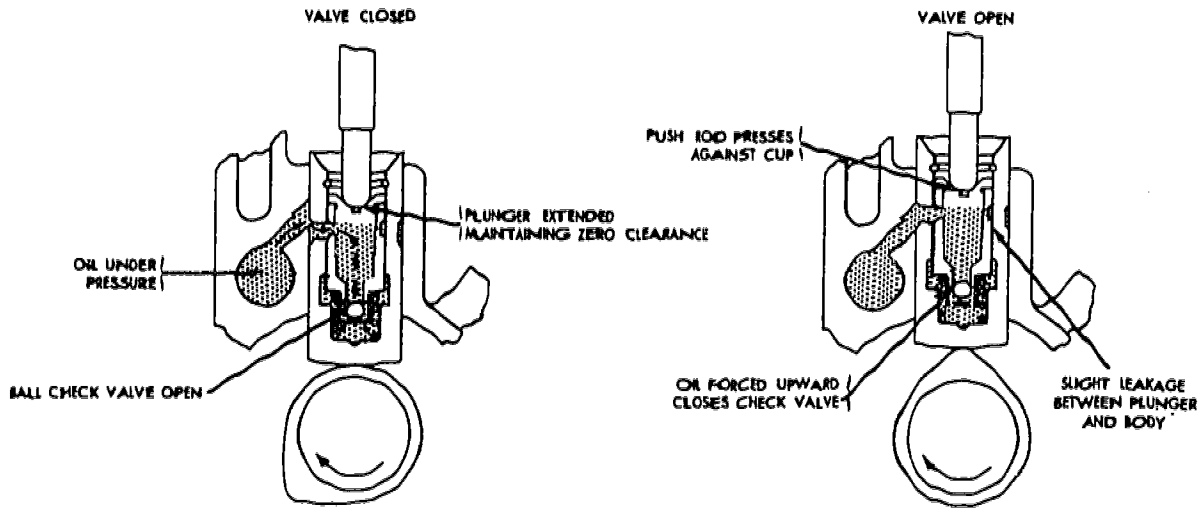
Operation of a hydraulic valve tappet or lifter.
